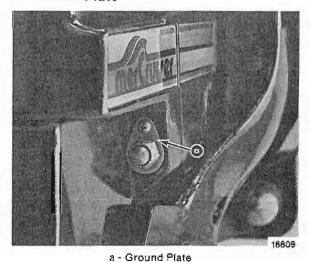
Drive Shaft Housing-to-Bell Housing Ground Plate
